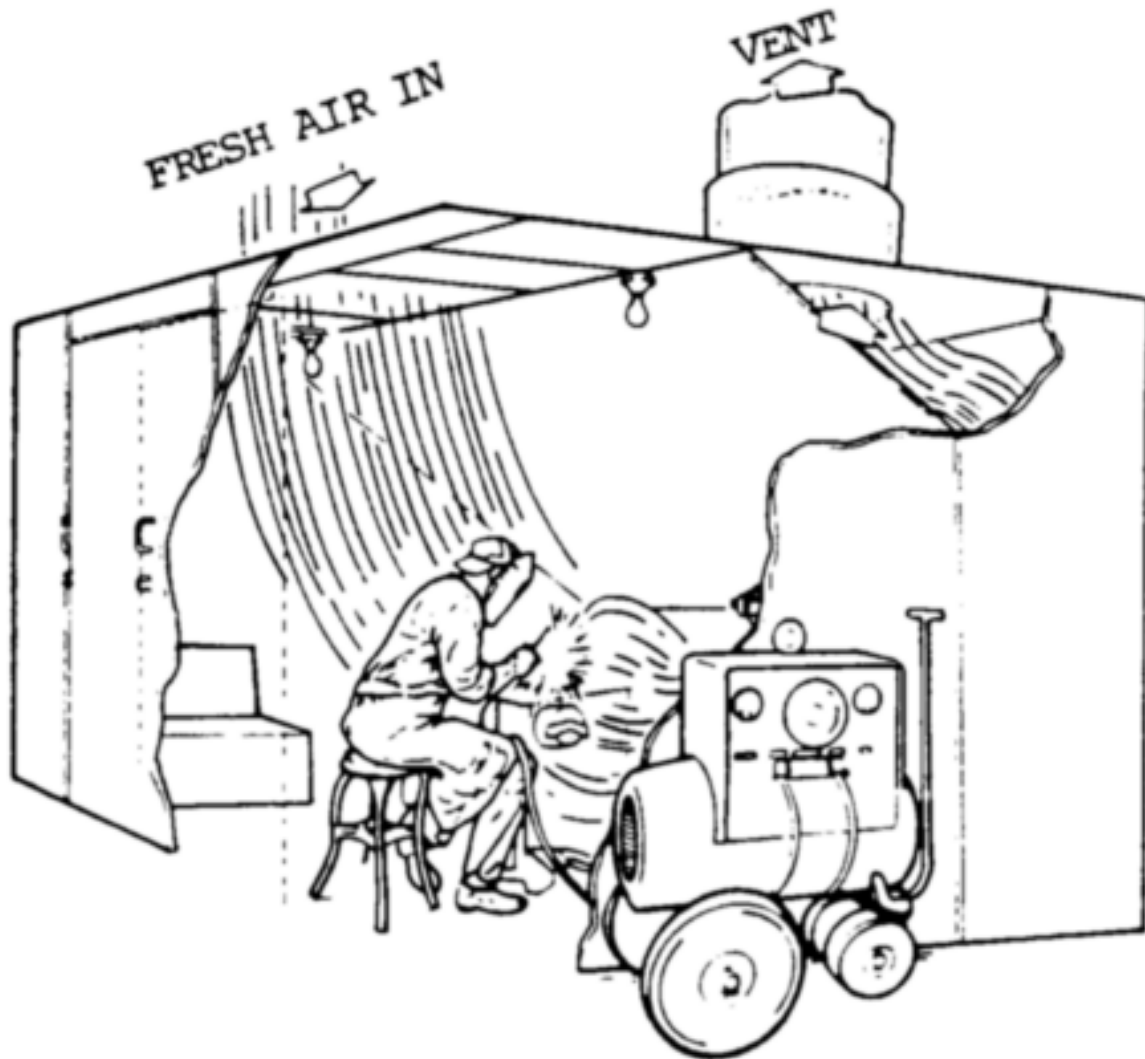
Welding booth with mechanical ventilation.
